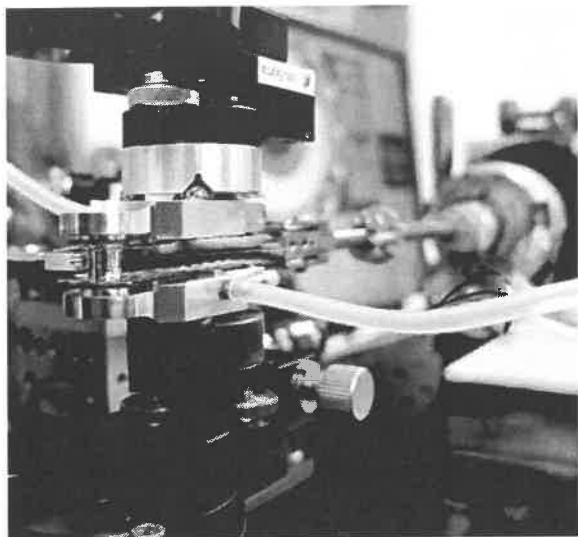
The upper and lower target half subassemblies are held in the FlexFAM by magnetically-coupled kinematic tooling mounts. The relatively long target base assembly, which gets connected to the ends of the upper and lower target half subassemblies, fades out of focus on the right side of the figure.
